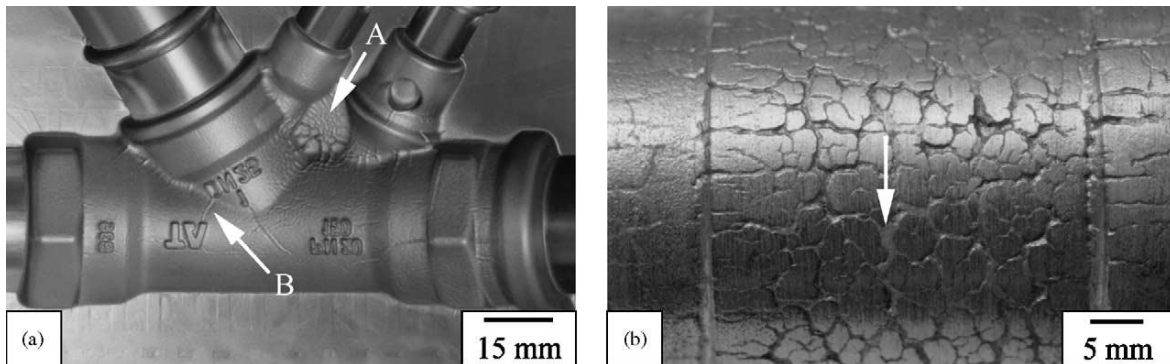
Typical macroscopic surface damages observed on worn-out cavity inserts and cores [16].
